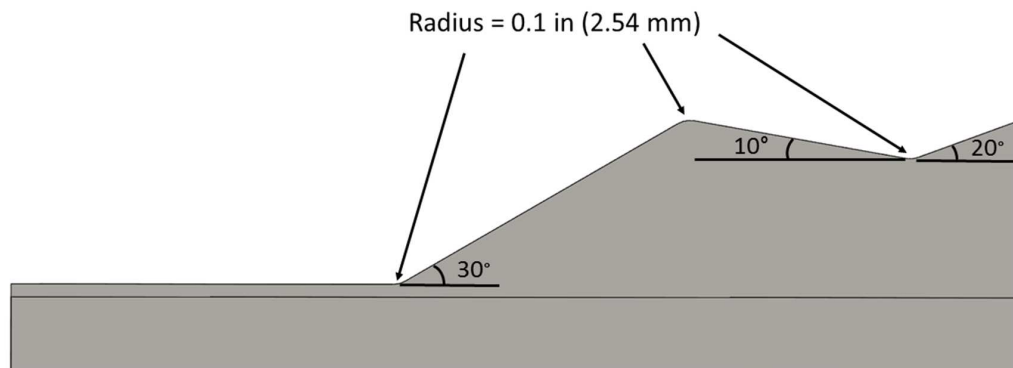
Cross-section of nozzle test insert fillet radius' and angles.
